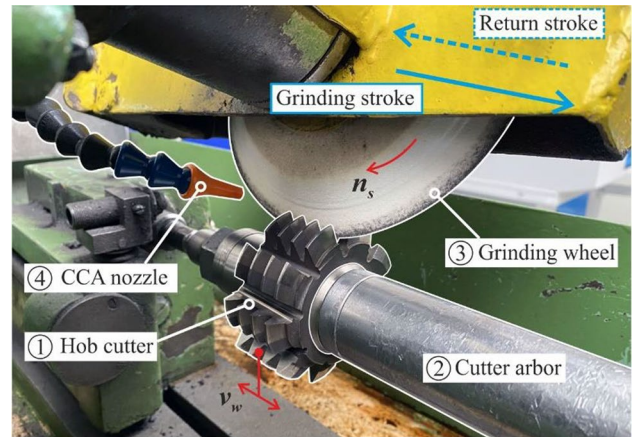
View of the machining zone during grinding the face of a hob cutter
